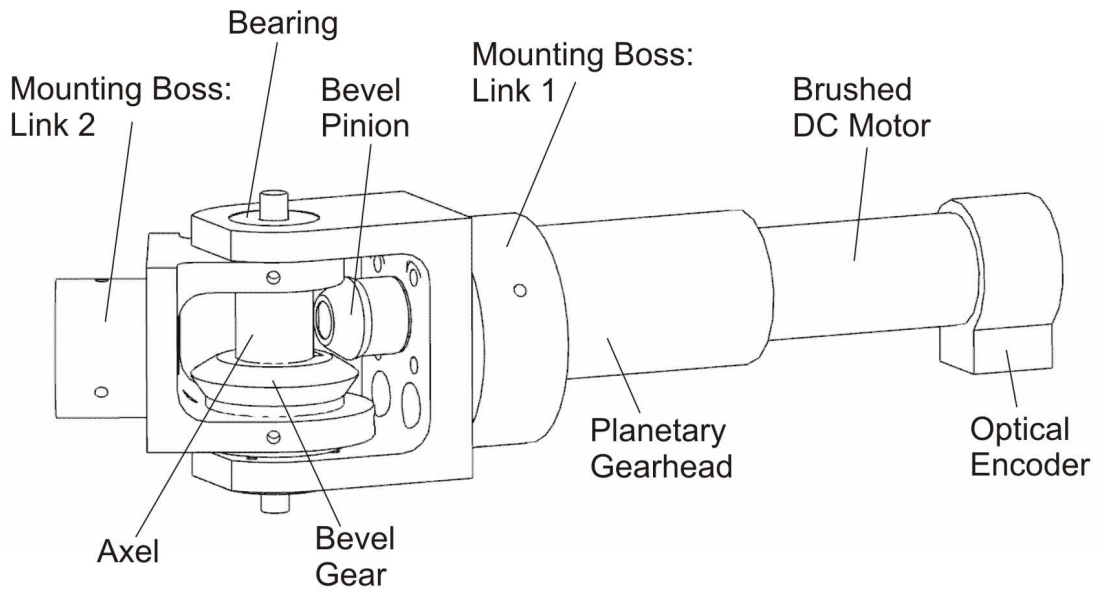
Primary components of joints 2 and 3. Joint 2 shown.
